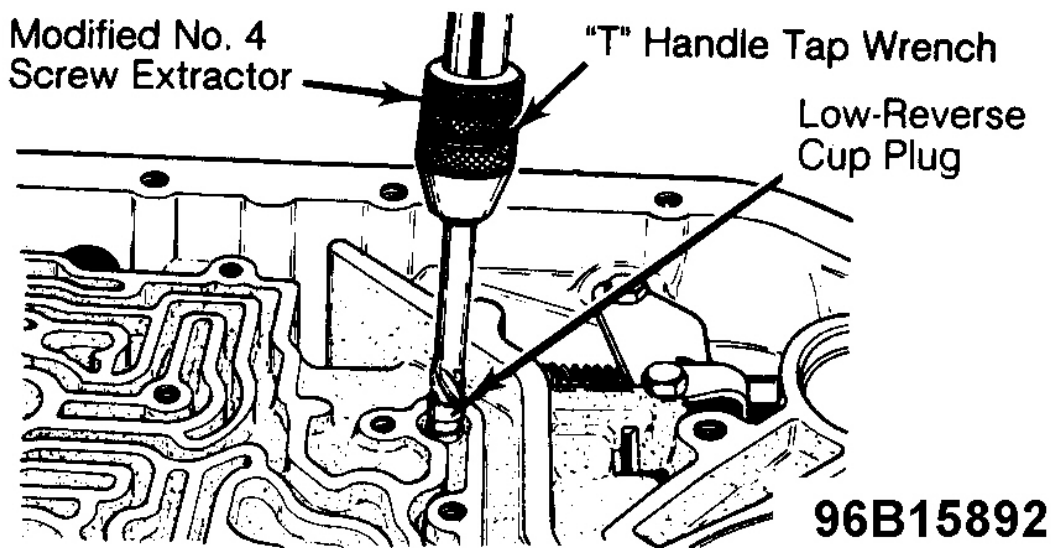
Removing Low-Reverse Clutch Housing Cup Plug
